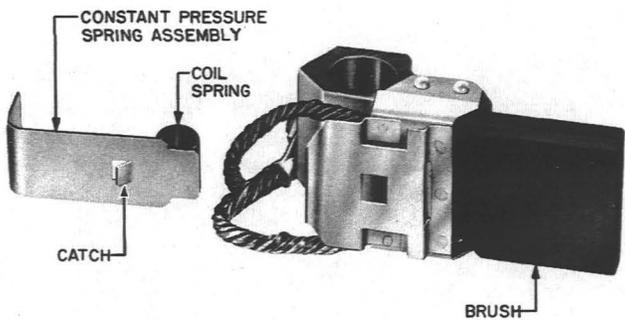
Constant Pressure Brush Holder - Disassembled
